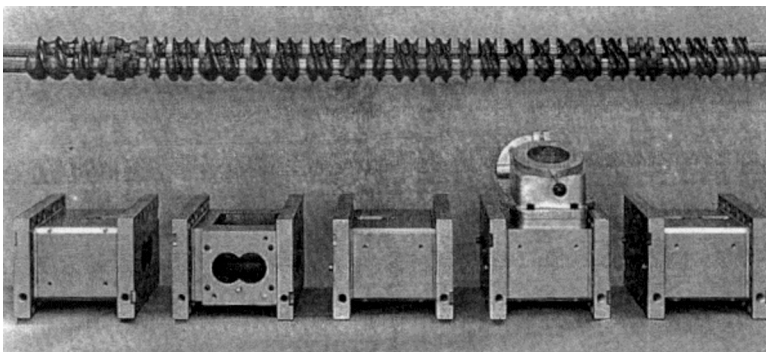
Werner & Pfleiderer ZSK modular co-rotating twin-screw extruder.
